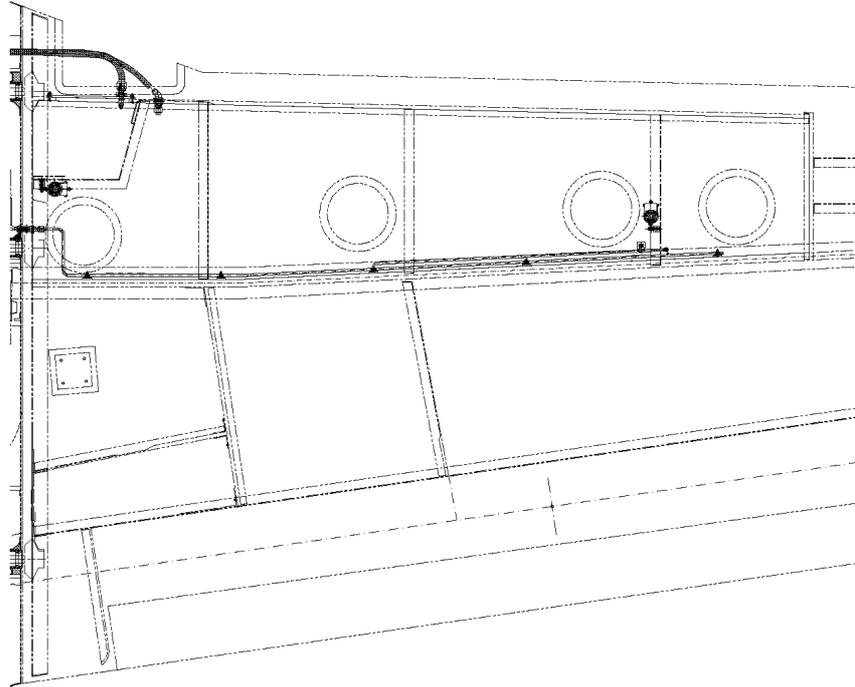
Position of Sensors in Aircraft wing (top view)
